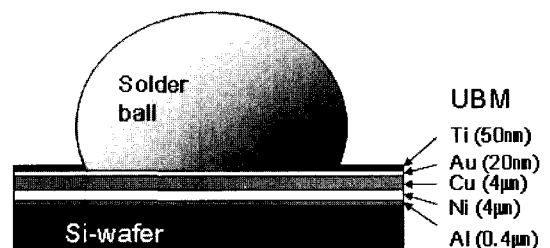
Schematic illustration of the soldering specimen with UBM layers.
